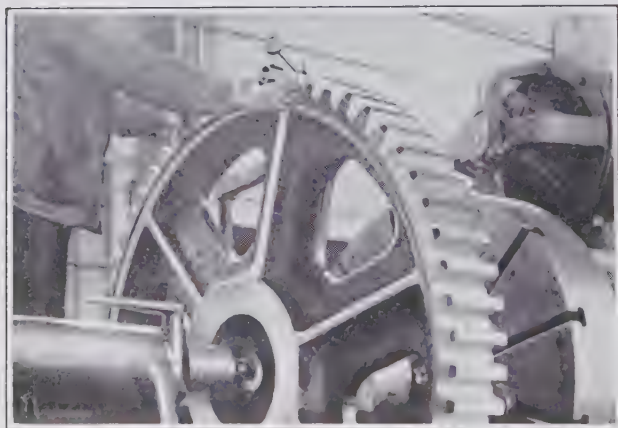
Measuring the eccentricity of a large gear mounted in a lathe.
